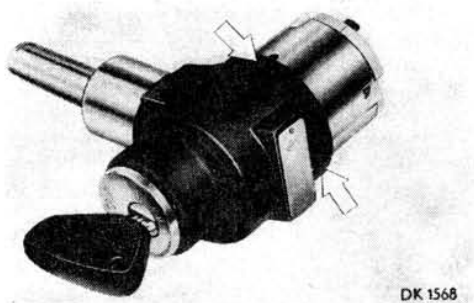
/1 - Switch Box with Steering Lock - the arrows indicate the cap screws (M 3.5) holding down the switch box in the steering lock housing
